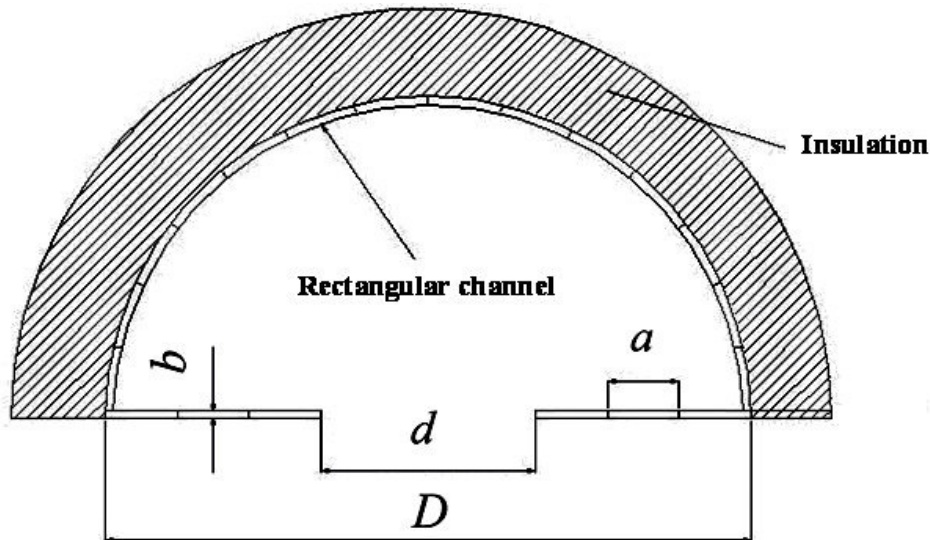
Cavity constructed with the use of a rectangular channel (plate) and its dimensions.
